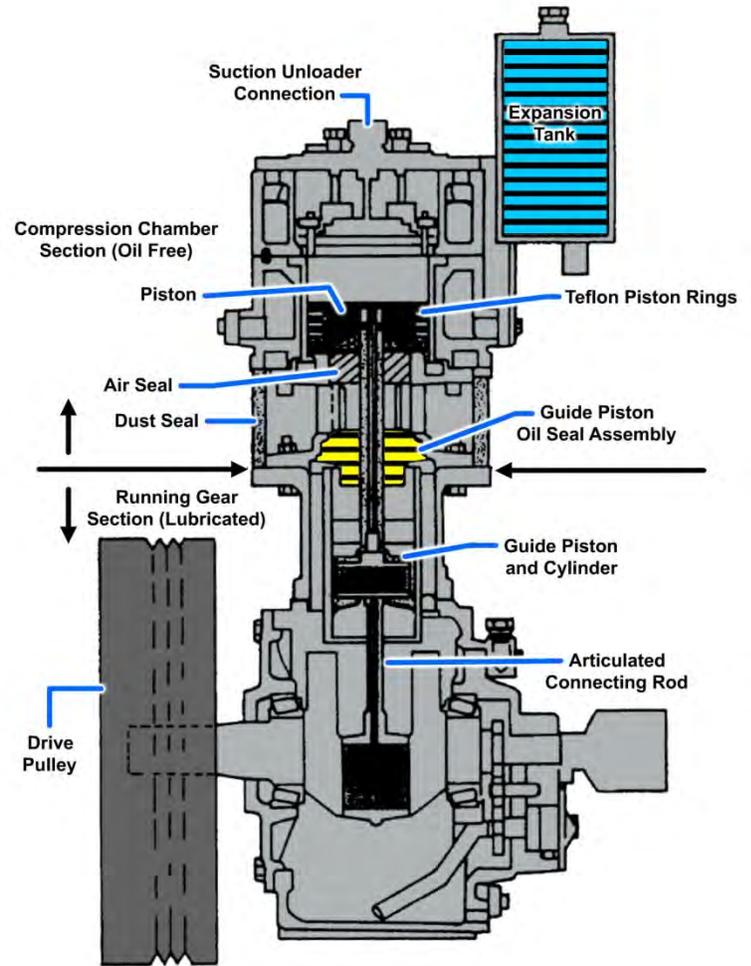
Cutaway view of an oil-free, LPAC.
